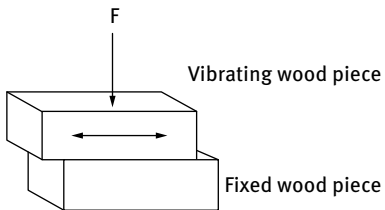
Schematic example of frictional movement used in linear vibration wood welding.
